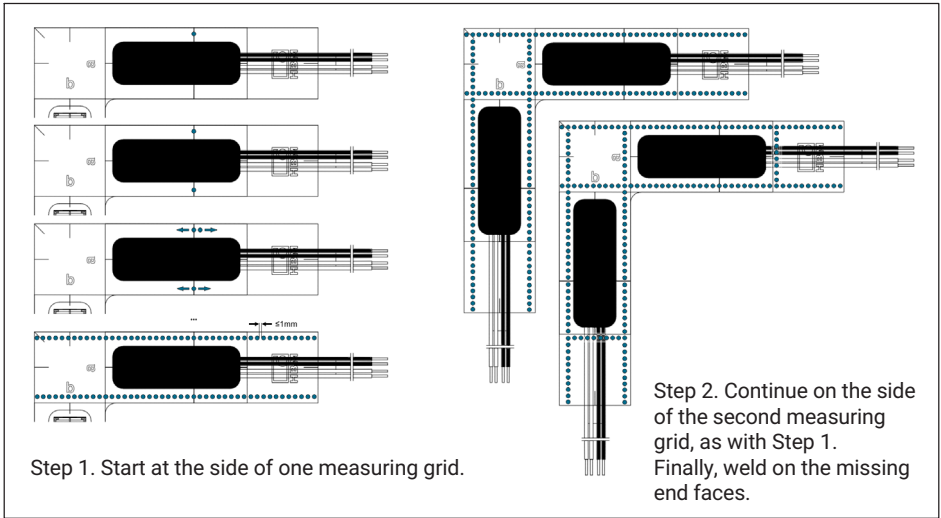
Welding sequence for the TS81 HT
